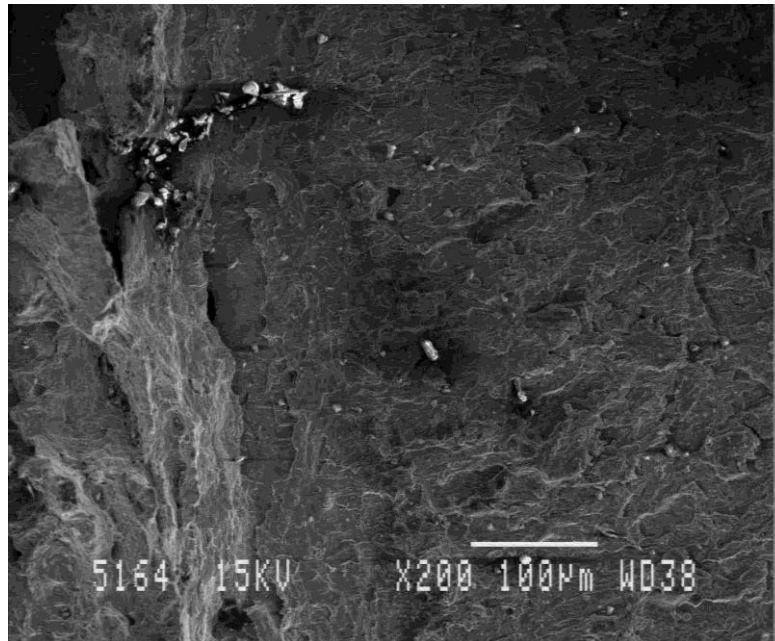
Typical SEM fractograph of SZW of J-integral tested for specimen GM-06
